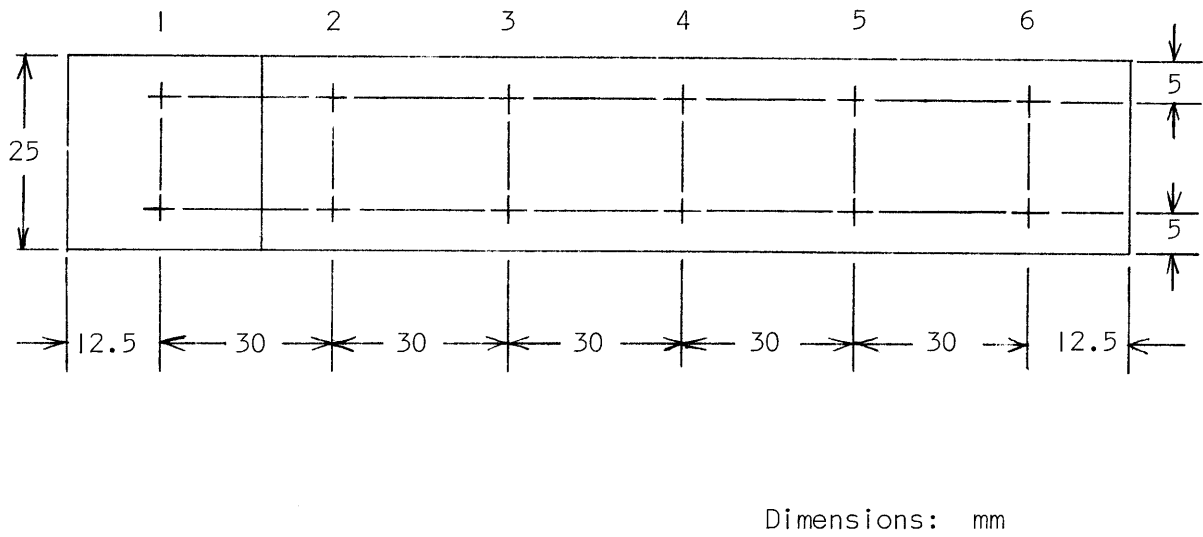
CANTILEVER BEAM MEASUREMENT LOCATIONS
